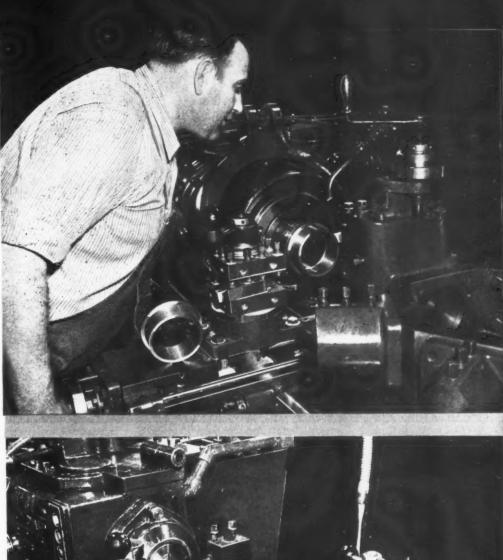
Turret Lathe Operation in which a Tool Takes a Cut 3/8 Inch Deep on Chromium-molybdenum Steel at a Surface Speed of 238 Feet per Minute and a Feed of 0.015 Inch
